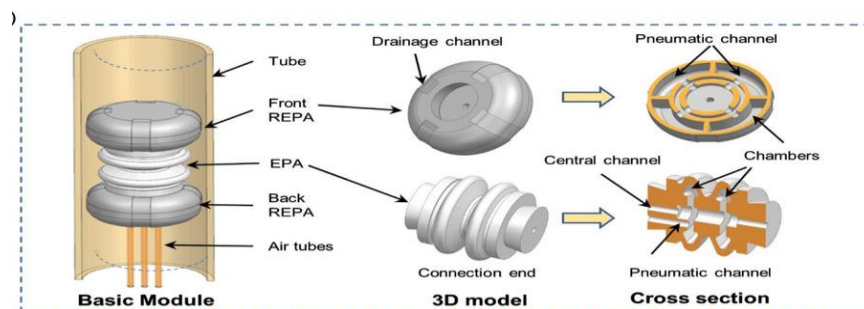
The design of the pipeline inspection soft robot. [6]
